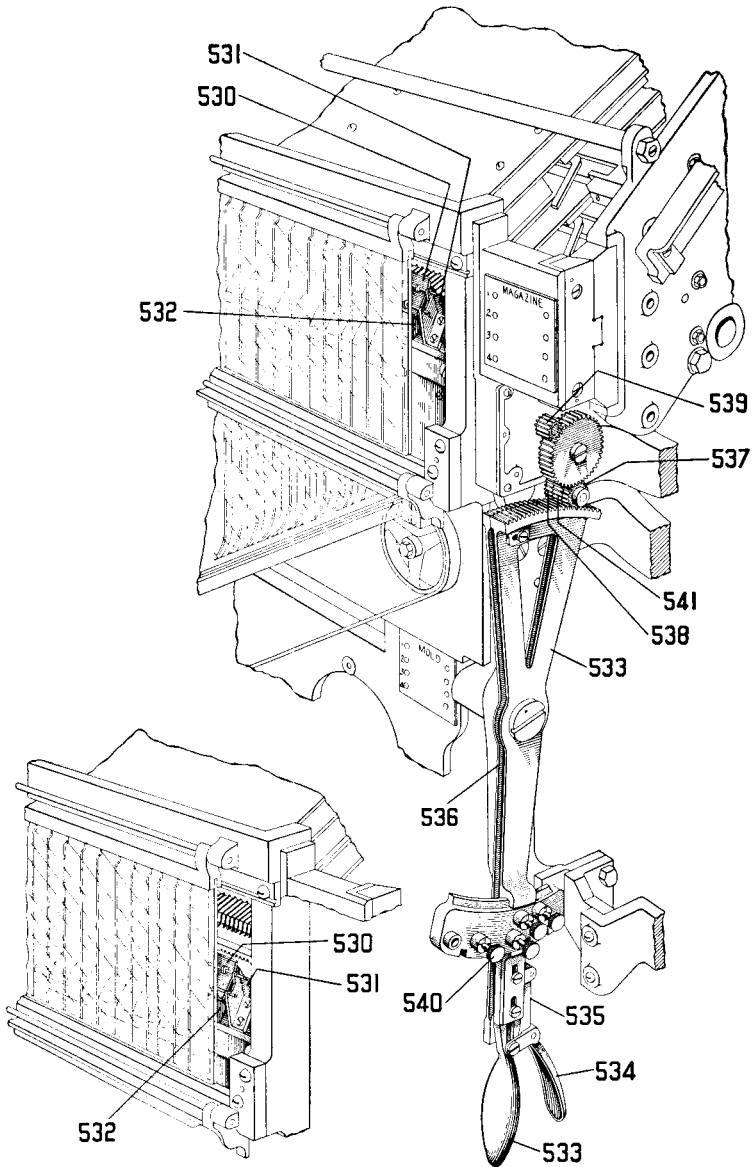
View showing operation of raising and lowering of the front on Model 9 Linotype. By pressing handle 534 against handle 533, pinion 538 is caused to revolve, bringing reeds 532 front, and out of register with the escapements of the magazines. By moving handle 533 forward or back, the pinion 541 operating through an idler gear on pinion 539 raises or lowers the front until the proper position is reached, when the part 535 snaps into one of four notches on the sector, thus holding the front in position. When handle 534 is released, pinion 538 is caused to revolve by a spring, which is not shown in the drawing, thereby bringing the subsidiary reeds under the escapements in the Model 9 magazines and the machine is ready to operate.
